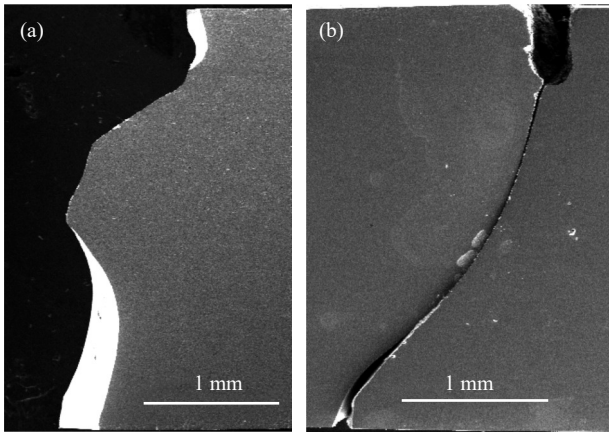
Fracture surfaces of WH4 (a) and WH6 (b) after SENB tests.
